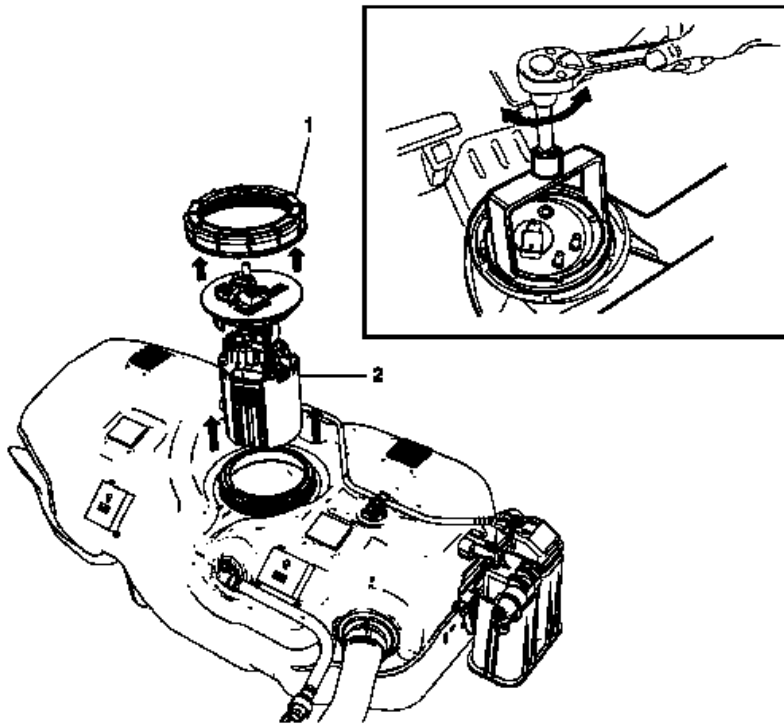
Fuel Tank Fuel Pump Module (LFM)
